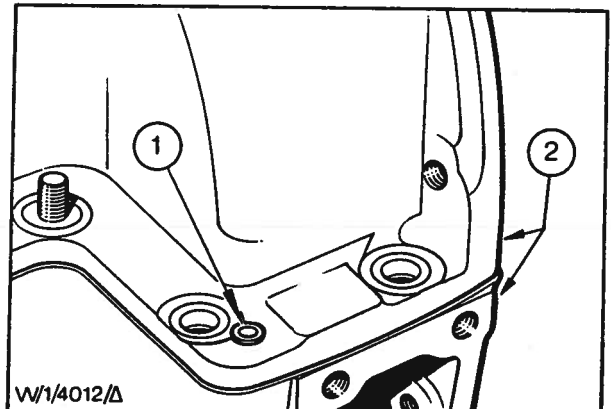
Oil Pan Rear Alignment - 2728T Engines
